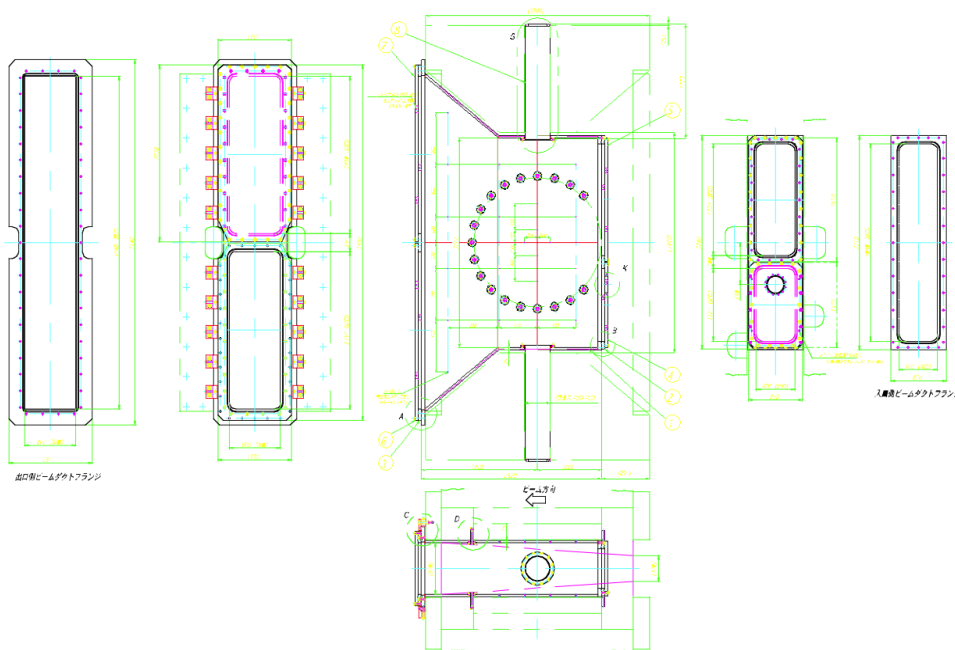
Vacuum chamber geometry of the magnet gap section.
